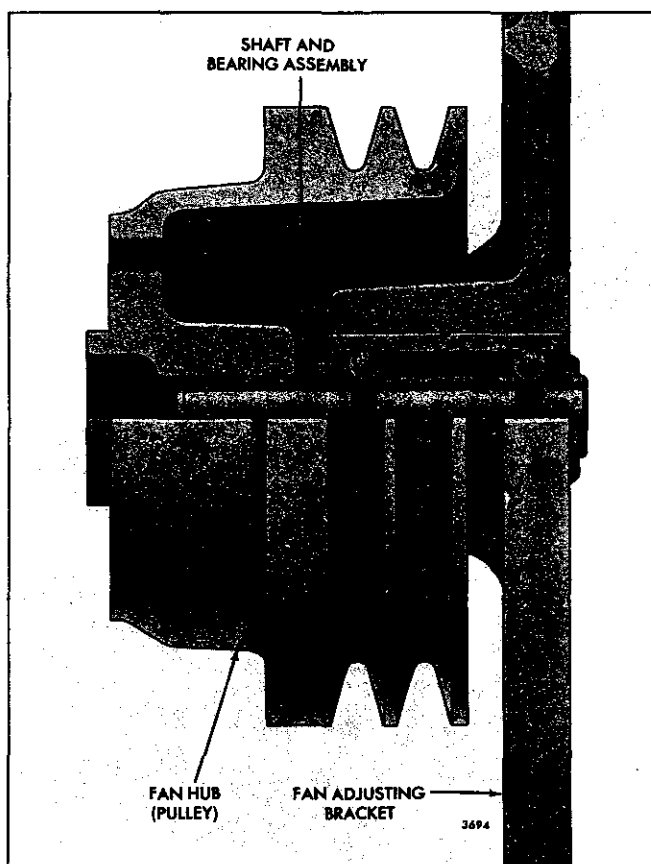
Ball Bearing Type Fan Hub Assembly
